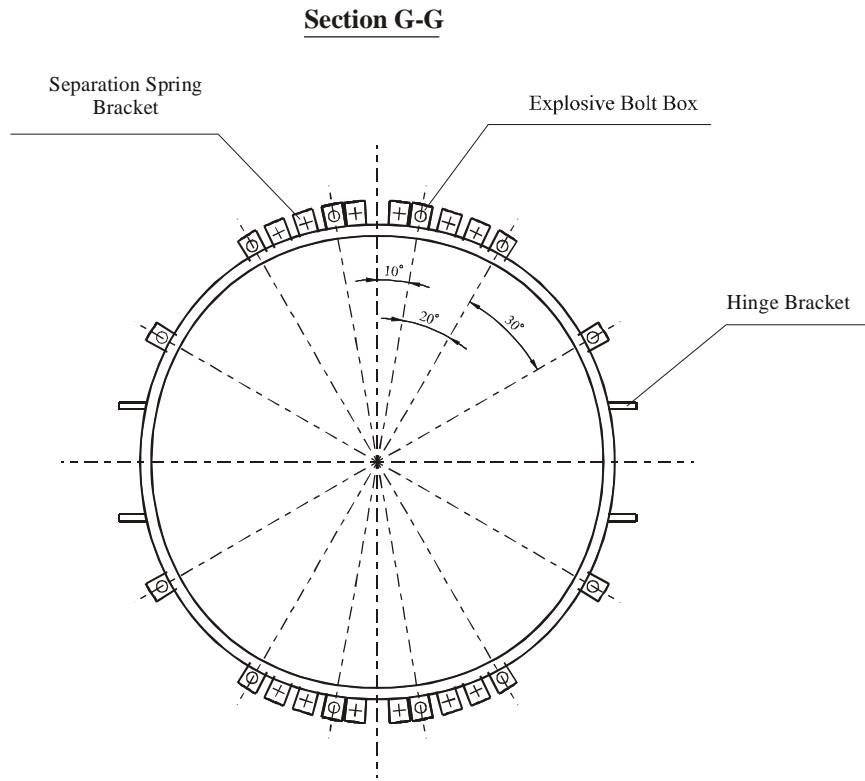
Distribution of the LV Lateral Unlocking Explosive Bolts
